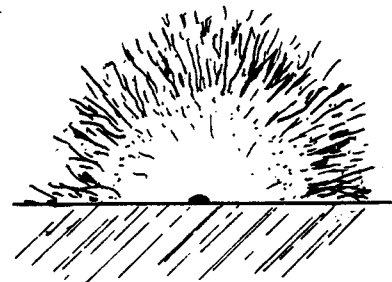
Schematic of Machining Crack Damage
